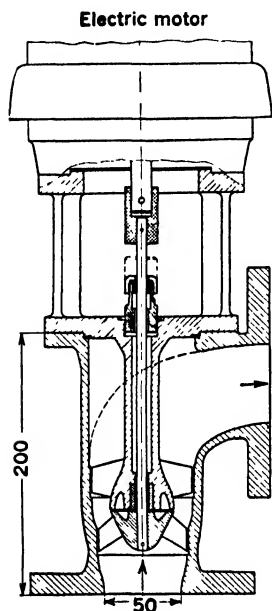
Klein, Schanzlin and Becker small propeller circulating pump for hot water heating system; dimensions in millimeters.
